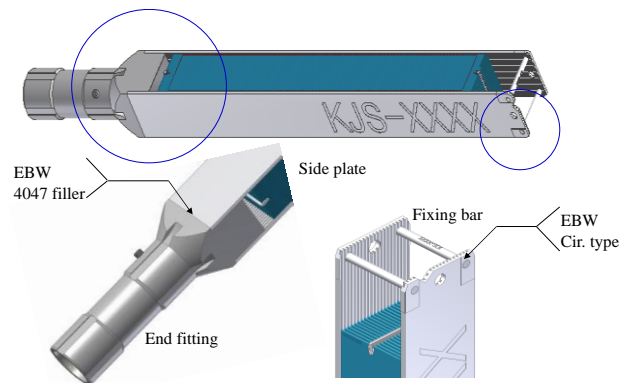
Schematics of weld configuration using the plate-type fuel assembly.
